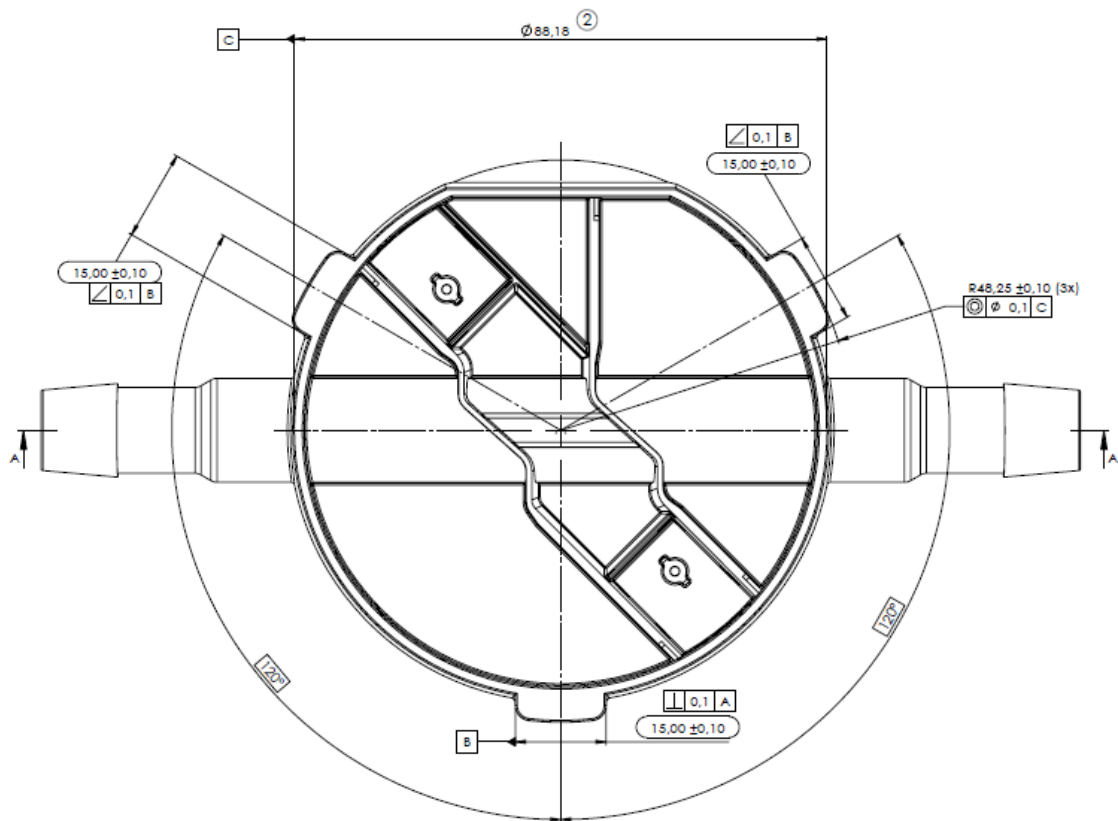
BioProTT™ FlowSU Sensor — Technical Drawing
